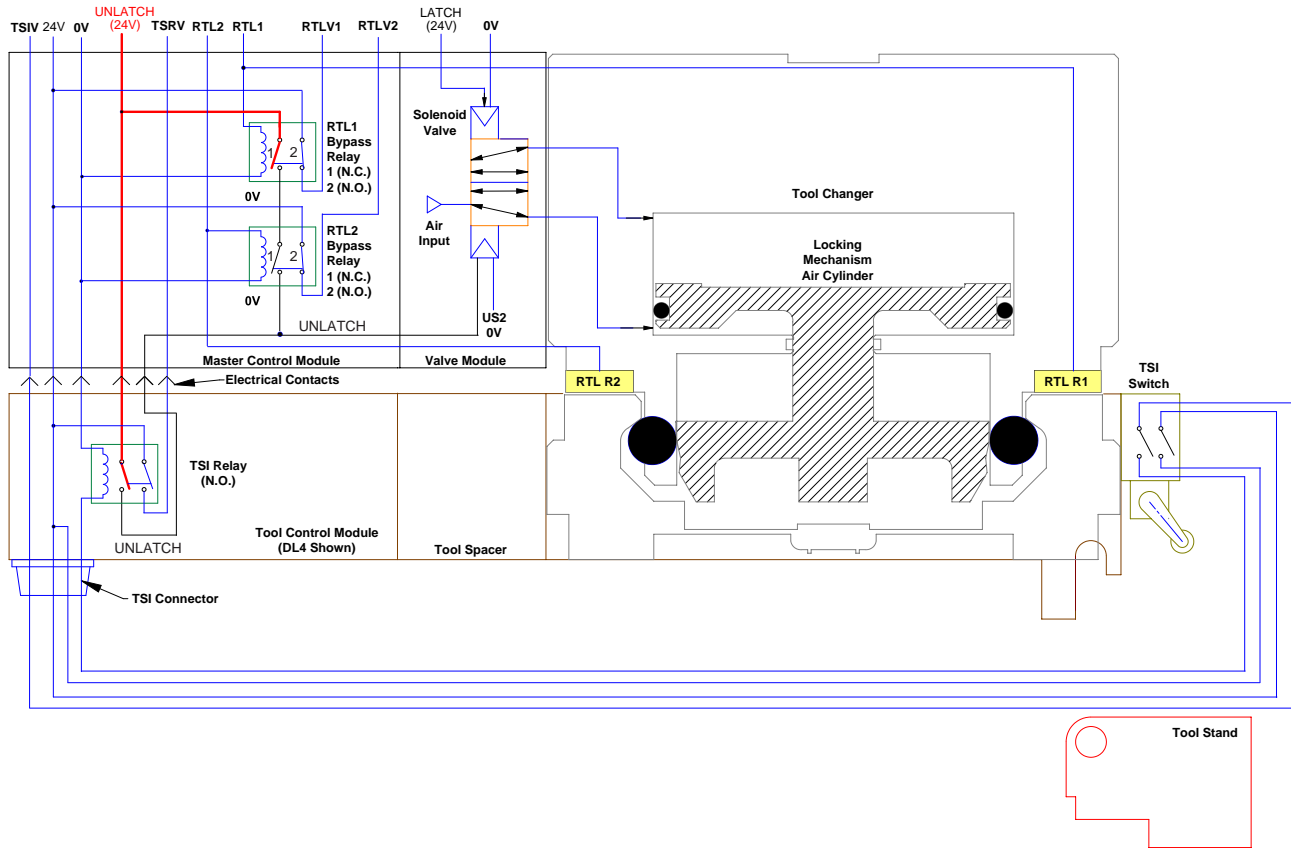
TSI Circuit with Master and Tool Locked (DL10-T Shown)
